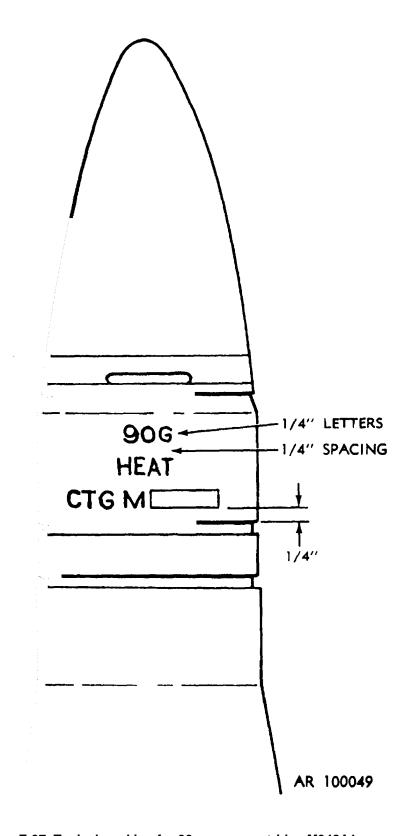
Typical marking for 90mm gun cartridge M348A1.
